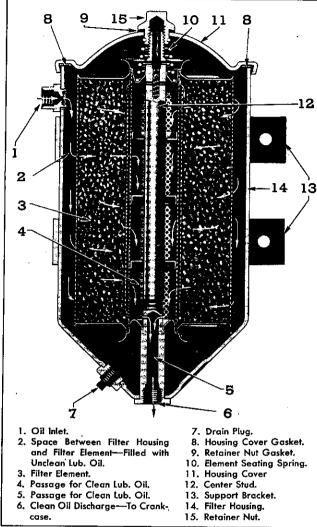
Replaceable Element Type Lubricating Oil Filter Assembly.
